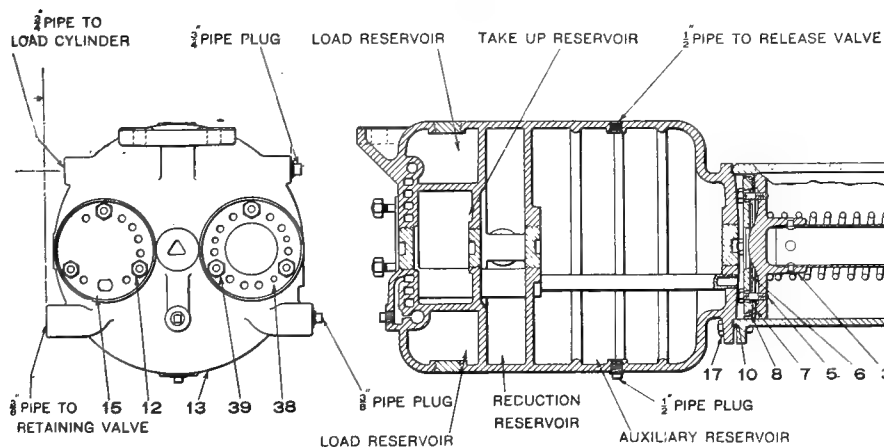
Empty Brake Cylinder, 10 in. by 12 in. and
